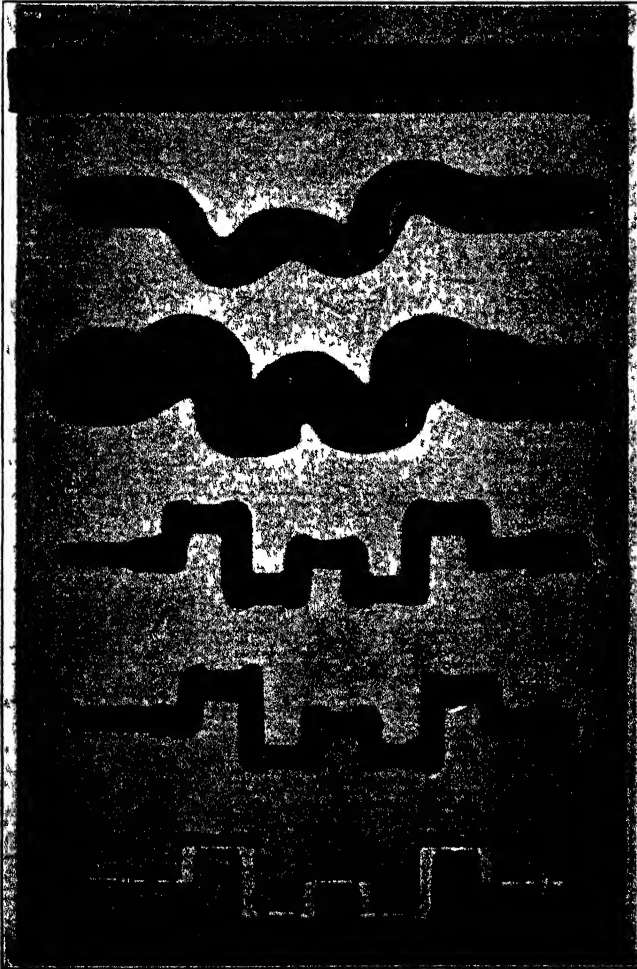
Stages in making a drop-forged crankshaft from a flat bar.
